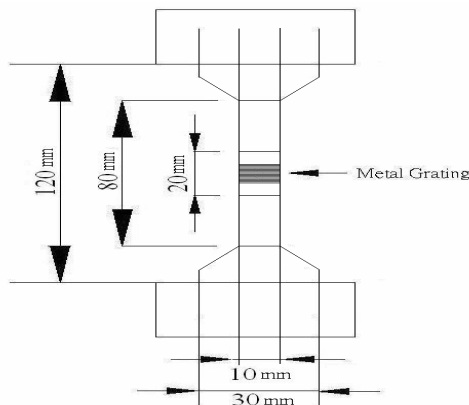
The top view of the tensile test sample (the dimension unit is mm).
